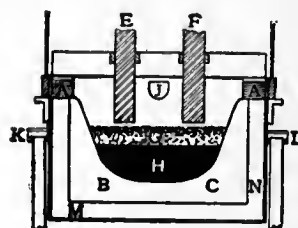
Heroult Double-Arc Electric Steel Purifying Furnace.
